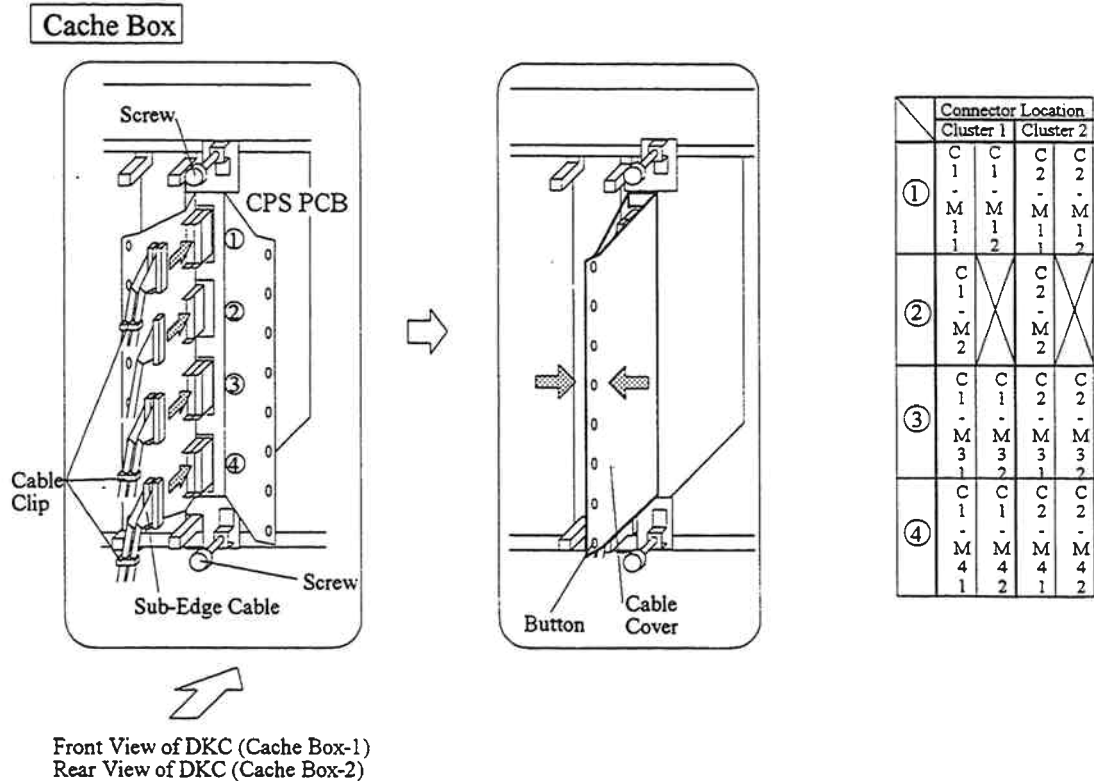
Insertion of the Cache PCB
